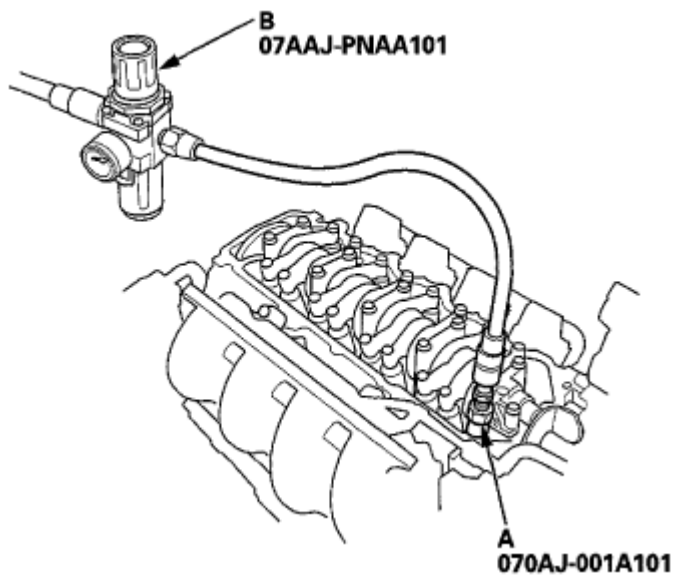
Installing VCM Air Adapter To Inspection Hole
